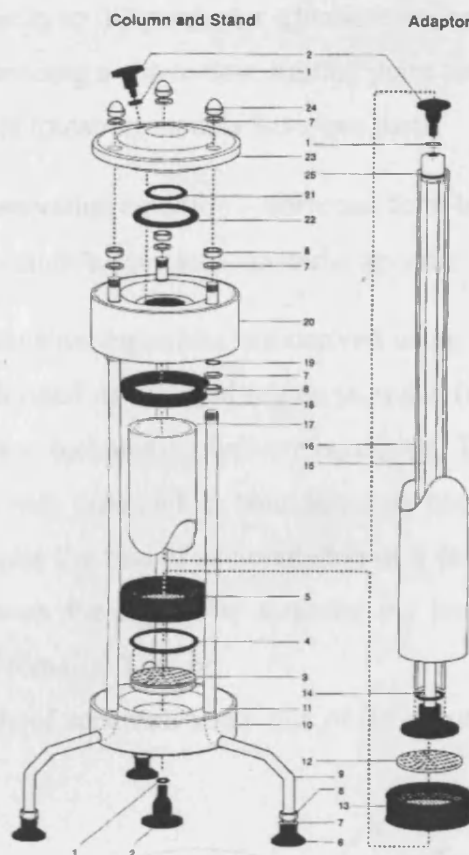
An exploded diagram of the principal components of the 0.05m diameter STREAMLINE column (ST-50): 1,14,19,22,25 O-rings; 2 connector; 3 distributor plate, 5 bottom net; 6 stand feet; 7 washer; 8 nut; 9 stand; 10 bottom flange; 11 adaptor plate; 12 adaptor distributor plate; 13 adaptor net; 15 adaptor; 16 rod piston; 17 column tube; 18 gasket; 20 upper flange; 21 rod sealing; 23 lid, 24 domed nut (source: Willoughby, N., 2000)
